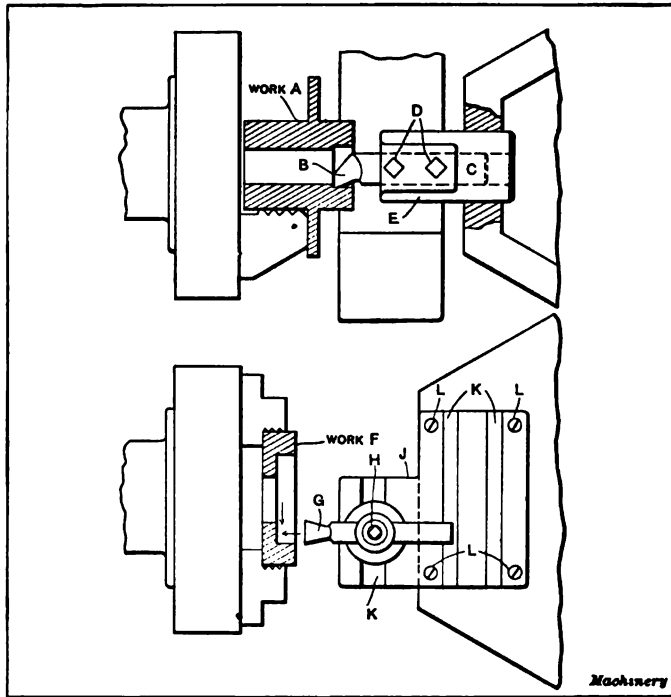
(Upper View) Single-point Starting Tool; (Lower View) Boring and Facing Tool
